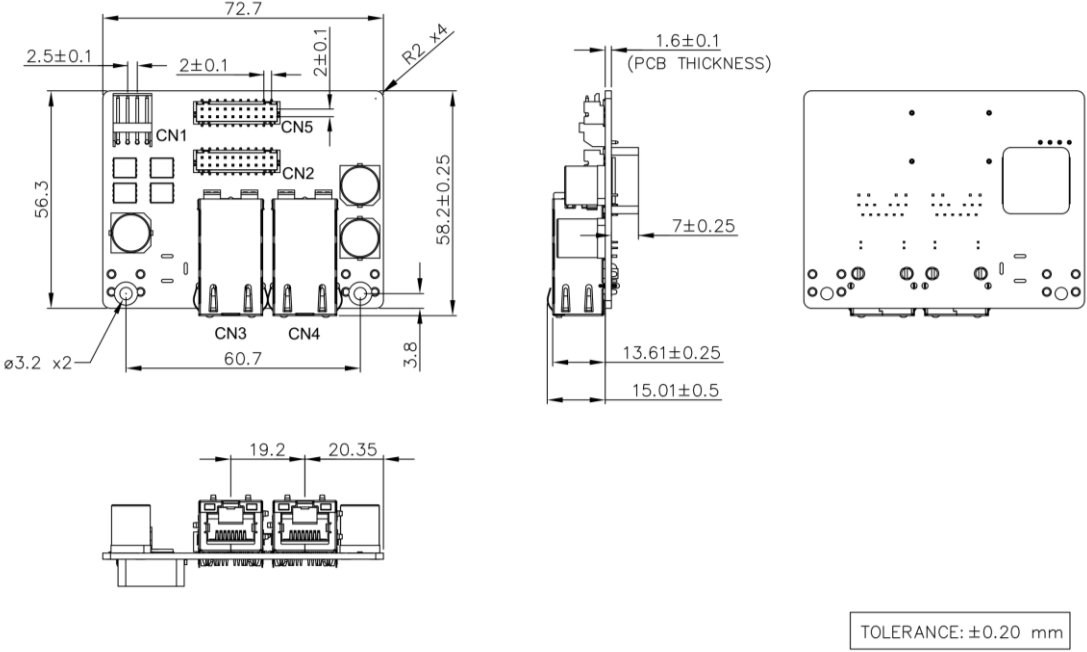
Bracket Daughter Board Drawing - 4Pin Header (EGPL-G2P1-C2/W2)
